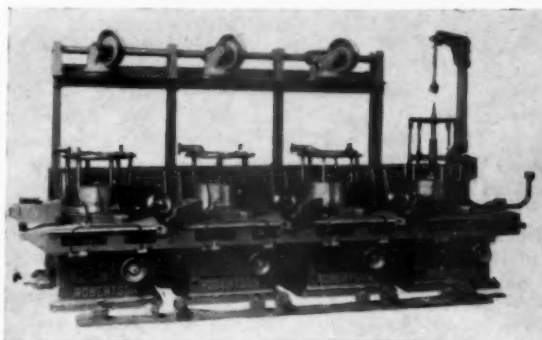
A continuous four-hole drafting machine for reducing 5 S.W.G. mild steel to 13½ S.W.G.
